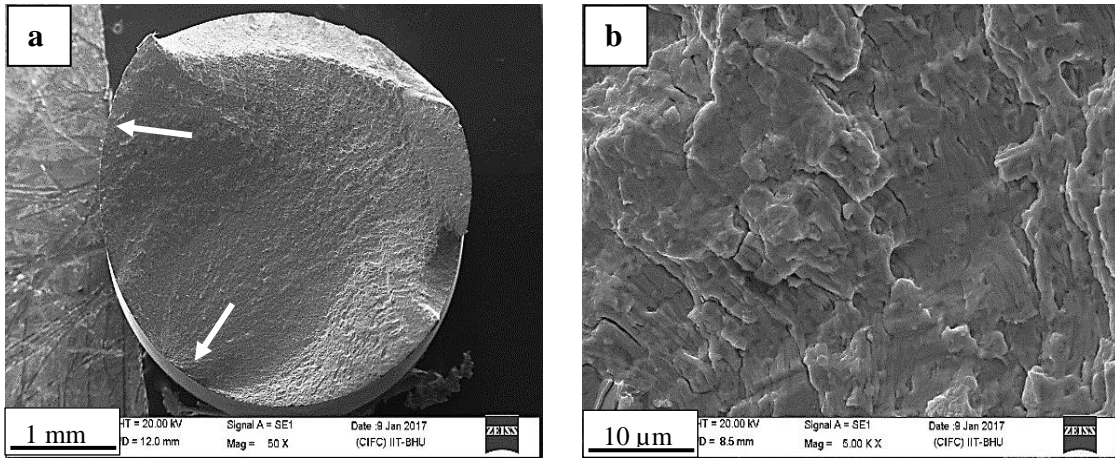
7: Fractographs of the as heat treated sample fractured at the stress amplitude of ± 750 MPa at 600°C showing: (a) fracture surface and crack initiation sites, (b) transgranular crack propagation and coarse fatigue striations.
